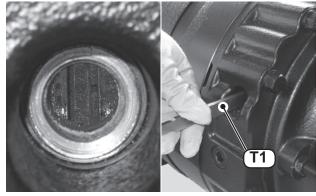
Apply the parking brake (or have someone hold the service brake) and with either brake applied, check the distance between discs using tool T1 (See drawing T1 p. 54). Minimum distance: 5,2 mm
